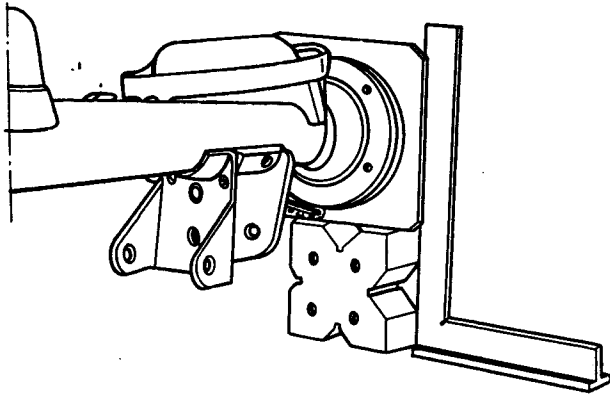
Checking Rear Axle Beam for Twisting Deformations with Angle Gauge Applied to Edge of Flange A.70172
